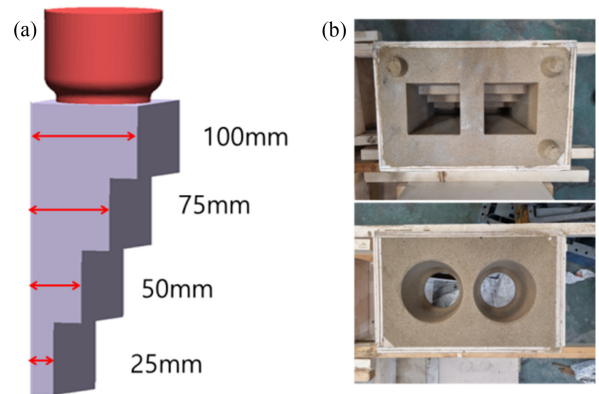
(a) Geometry and (b) Actual images with pouring cup and riser (lower image) of step casting mold used in this study
